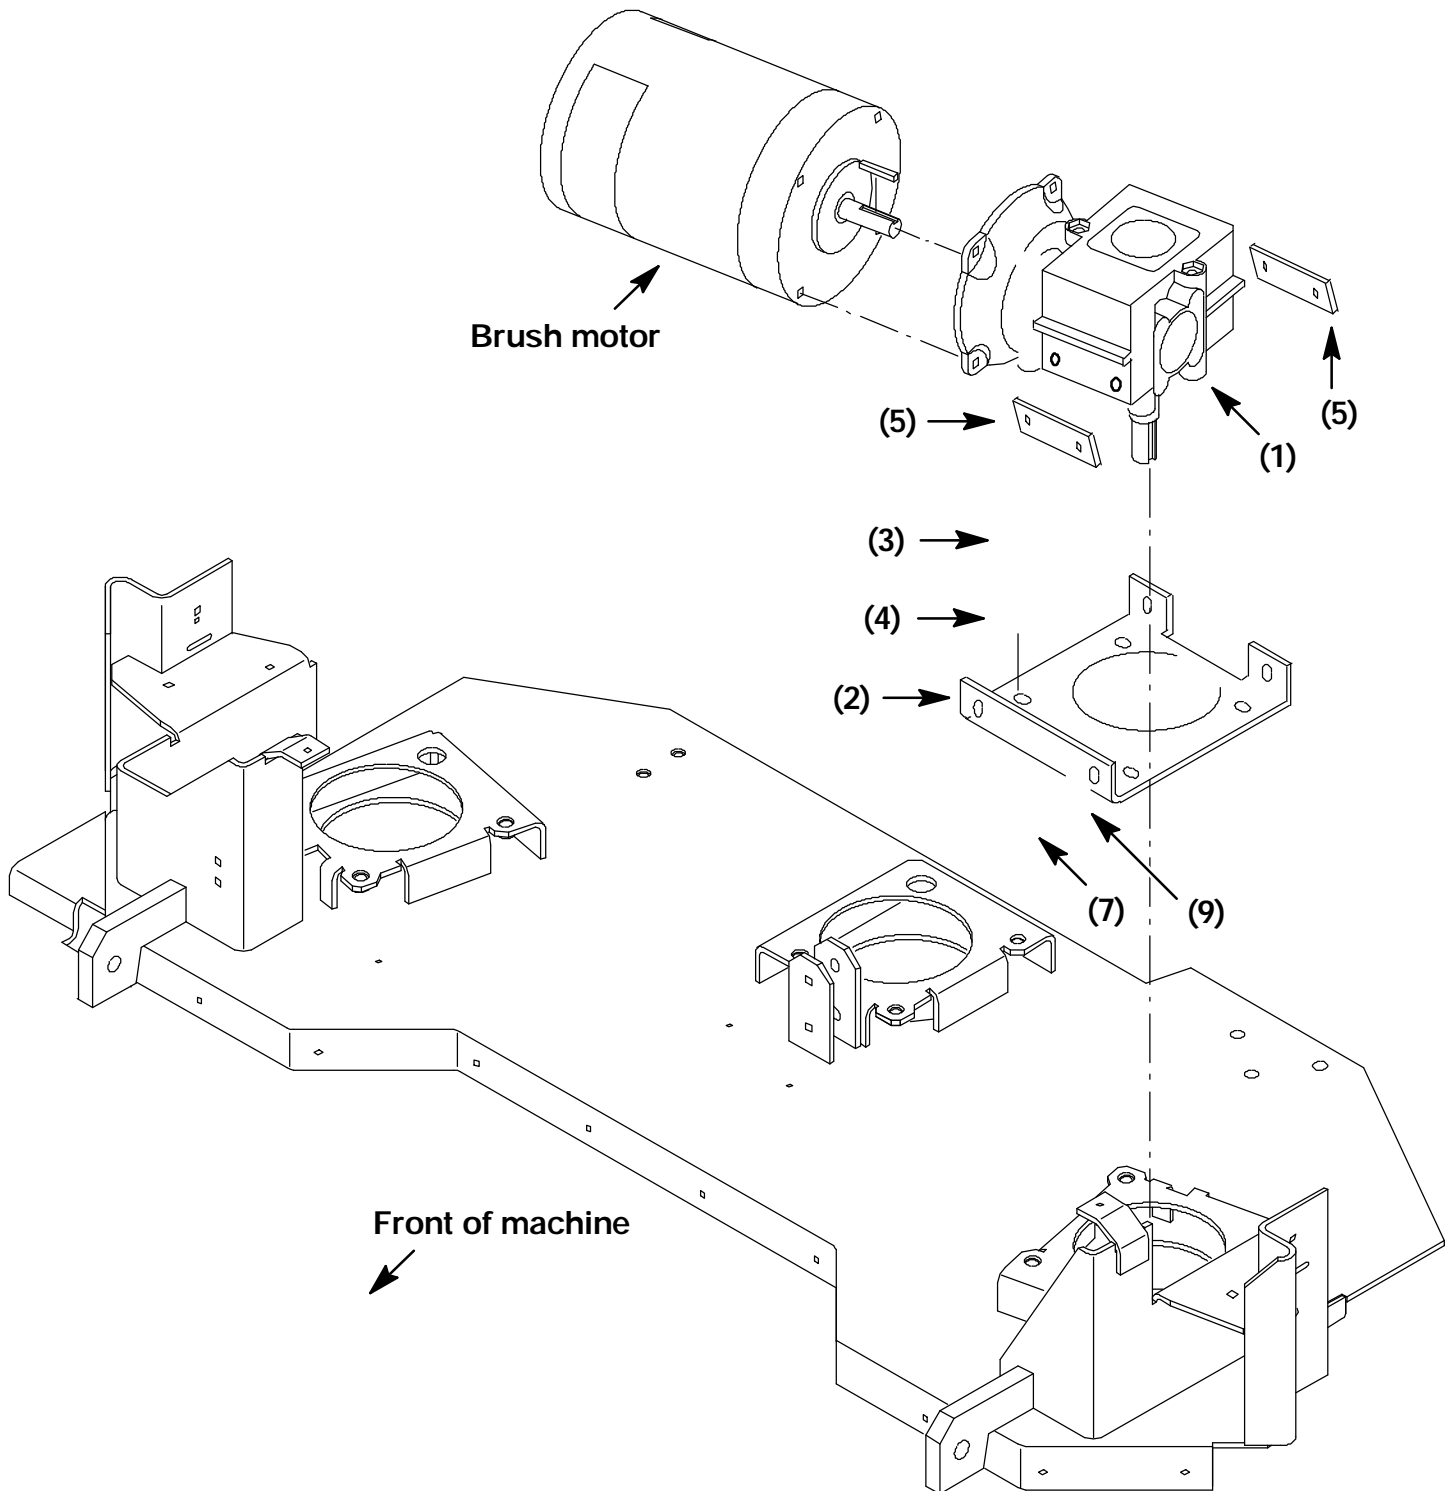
MAX PRO 1200 Scrub Head (left hand gear box)
